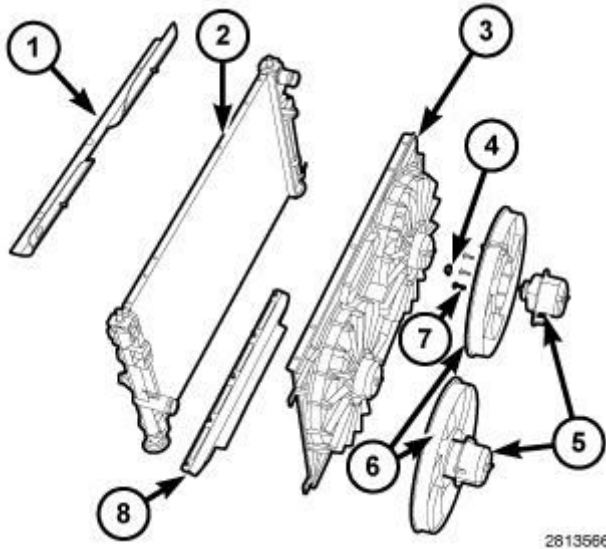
Lower, Fan Blade Retaining Nut & Fan Motor
